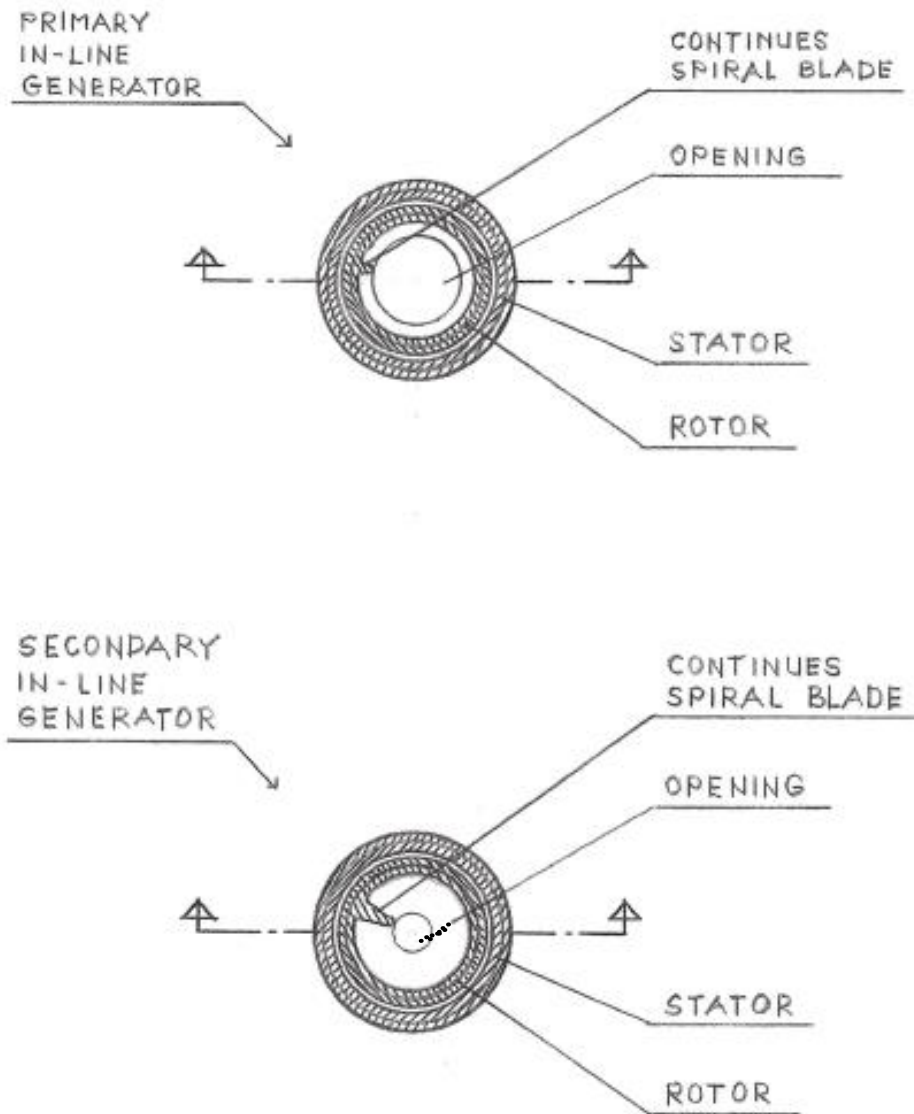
Cross-sectional Frontal View of the Primary and Secondary In-Line-Pump / Generator
